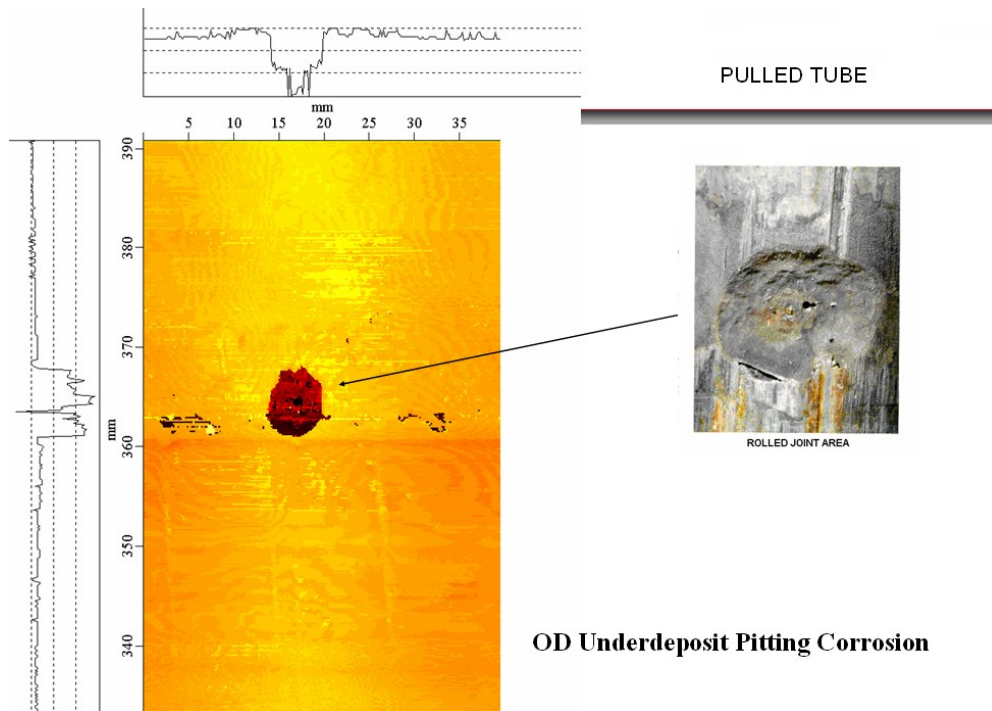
Ultrasonic image of severe tube OD pitting corrosion
